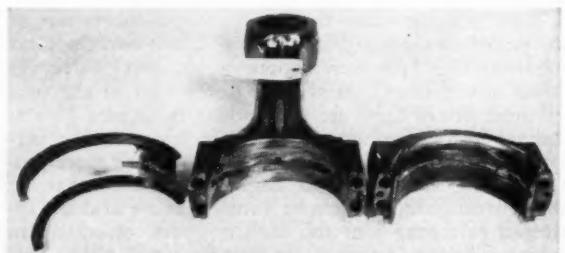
Connecting-rod-bearing failure causing damage to crankshaft
